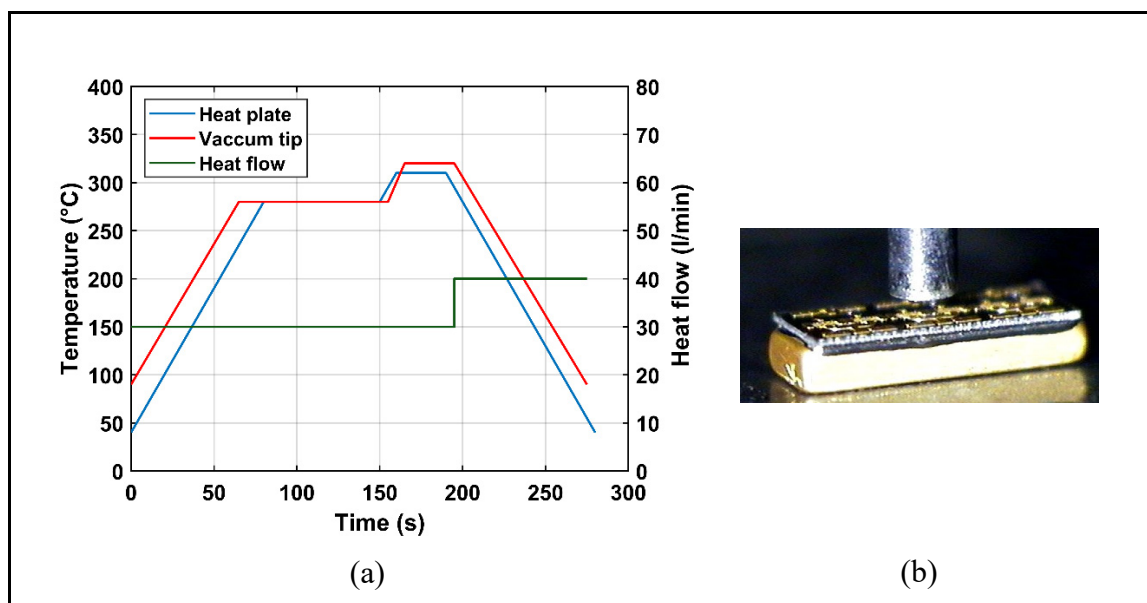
The heat patterns for soldering power-bar on copper graphite interposer: (a) for heat plate (b) for vacuum tip, (c) GaN die soldered on the copper-graphite interposer with melted AuSn
